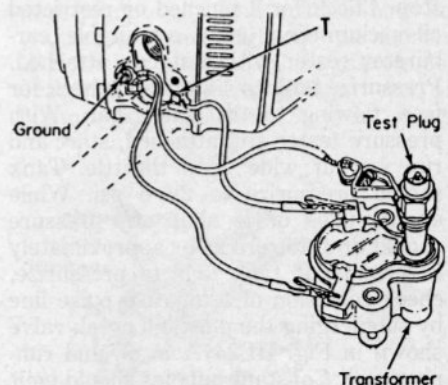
A test plug may be used to determine if ignition system is operating correctly. See text.
